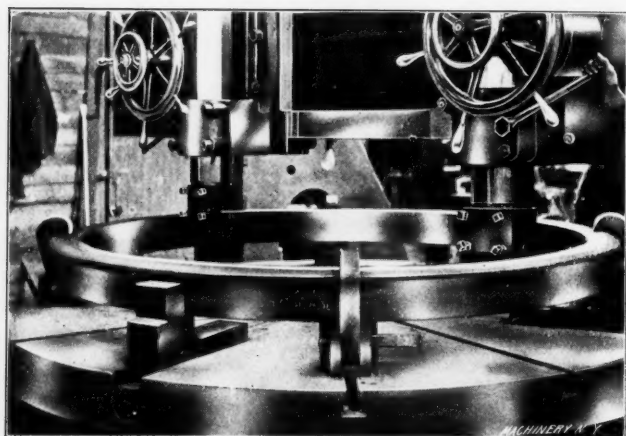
Driving Wheel Tire held in Place on the Boring Mill by Hook-clamps
